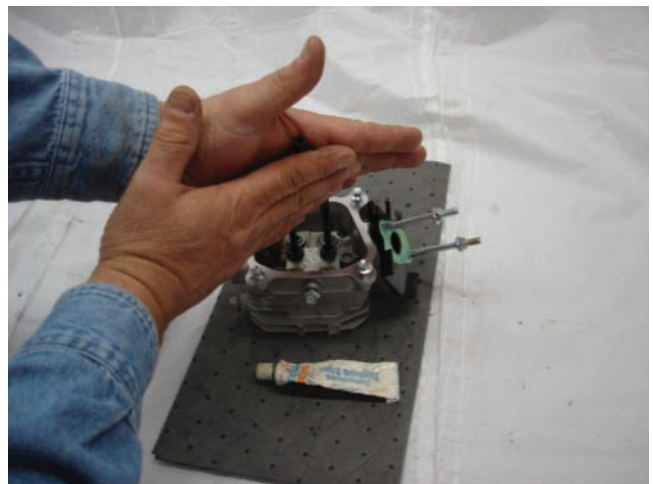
Using a small hose on the end of the valve makes for a handy valve lapping tool.
